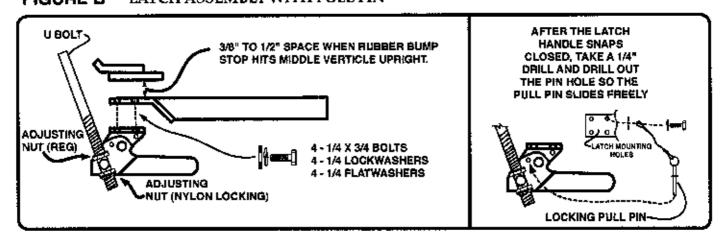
FIGURE B LATCH ASSEMBLY WITH PULL PIN
